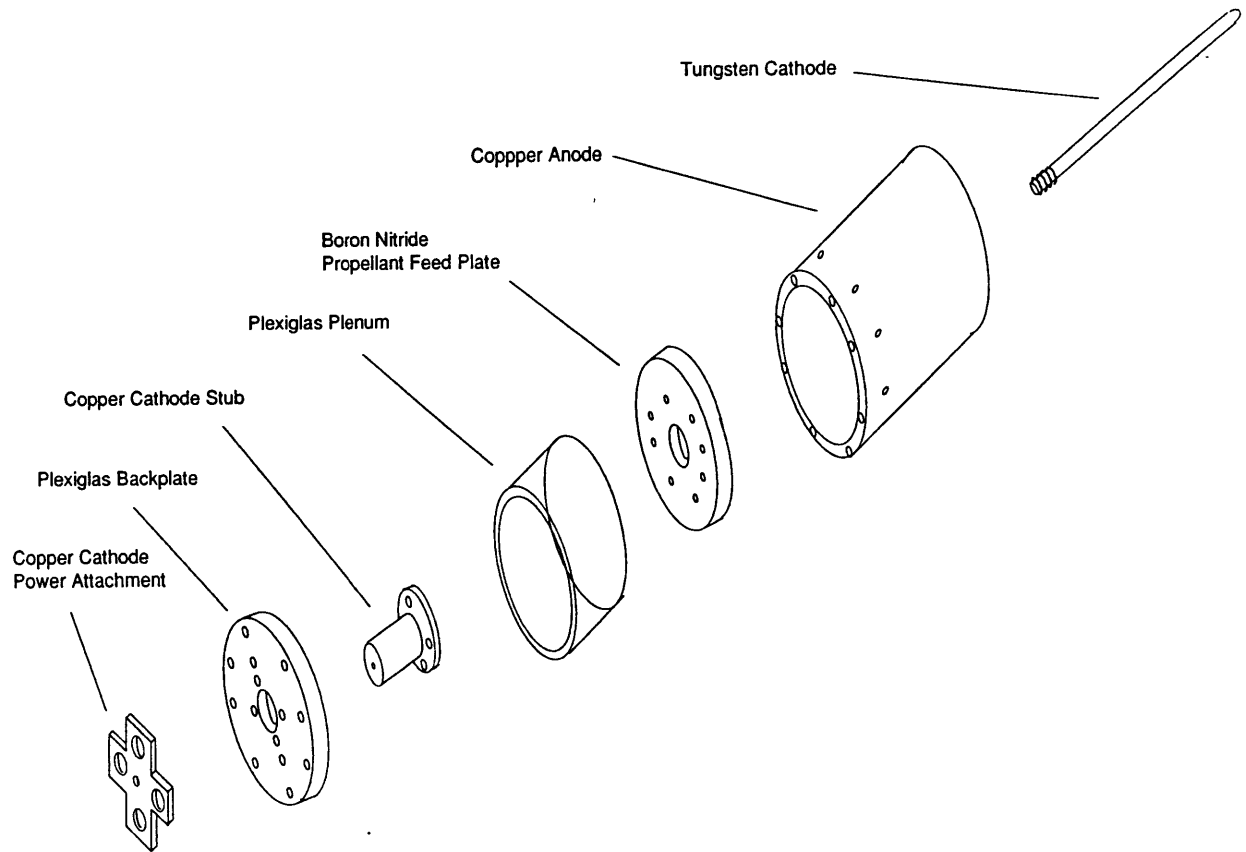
A Magnetoplasma-dynamic (MPD) Thruster Assembly Drawing
